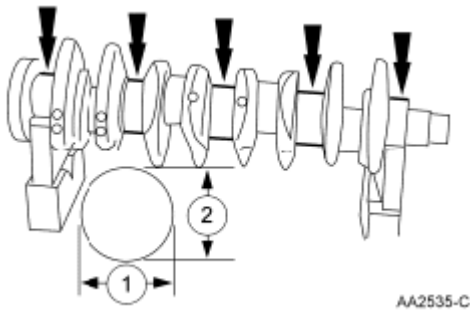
Identifying Measuring Directions Of Crankshaft Main Bearing Journal Diameter
